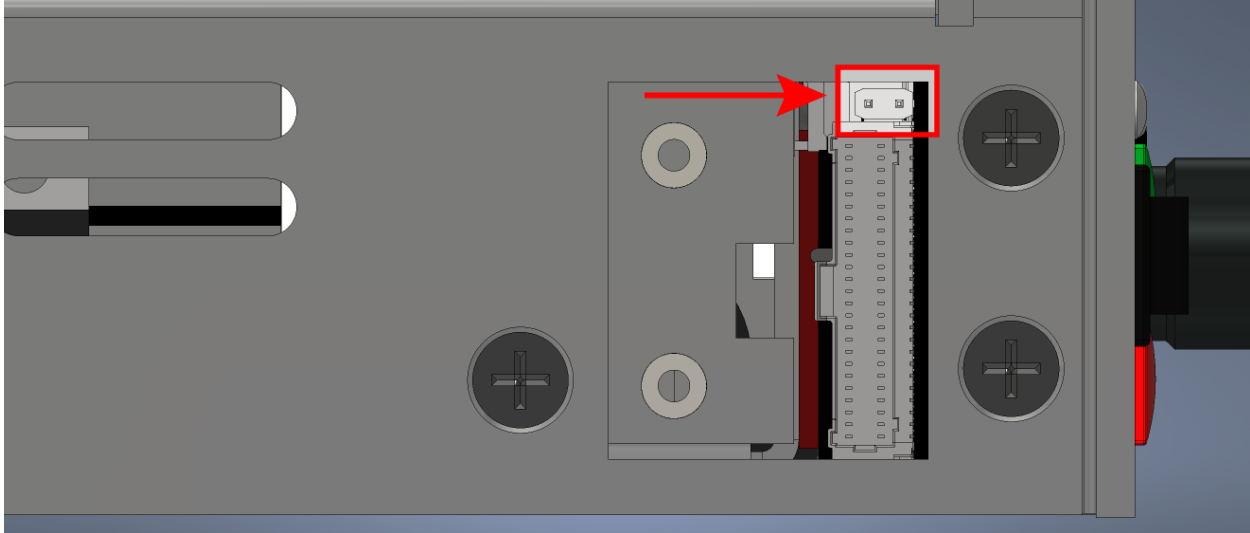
Test access panel with protective cover removed and a red arrow to indicate e-stop jumper
